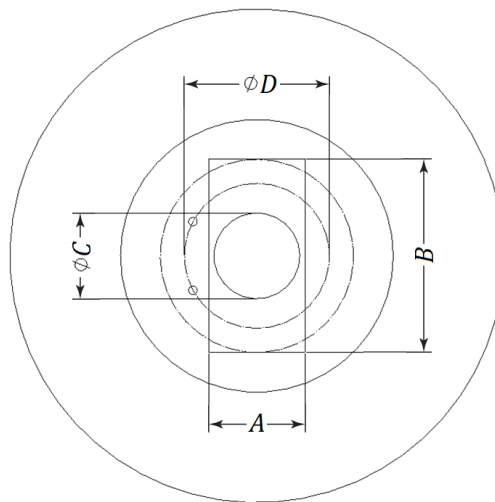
Side view of the wheel assembly and knuckle dimensions.
